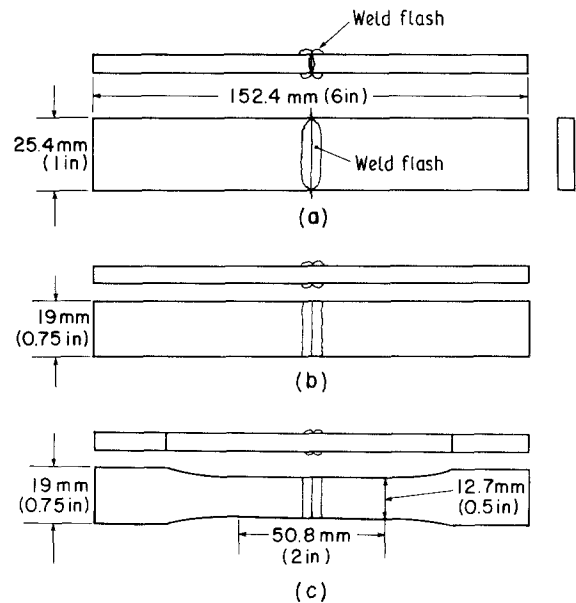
Geometry of specimens for determining the strength of butt welds.
